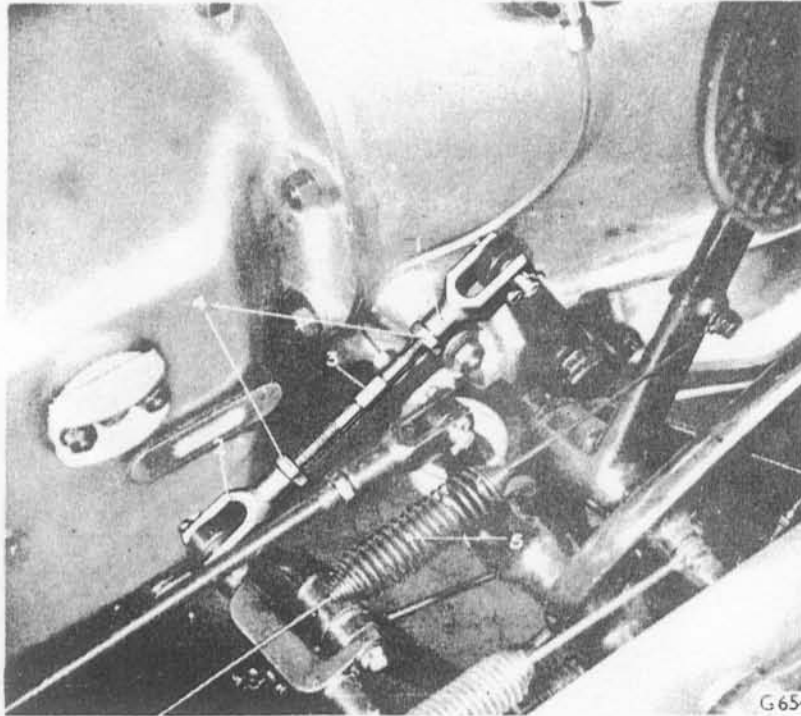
ADJUSTMENT CLUTCH PEDAL.
